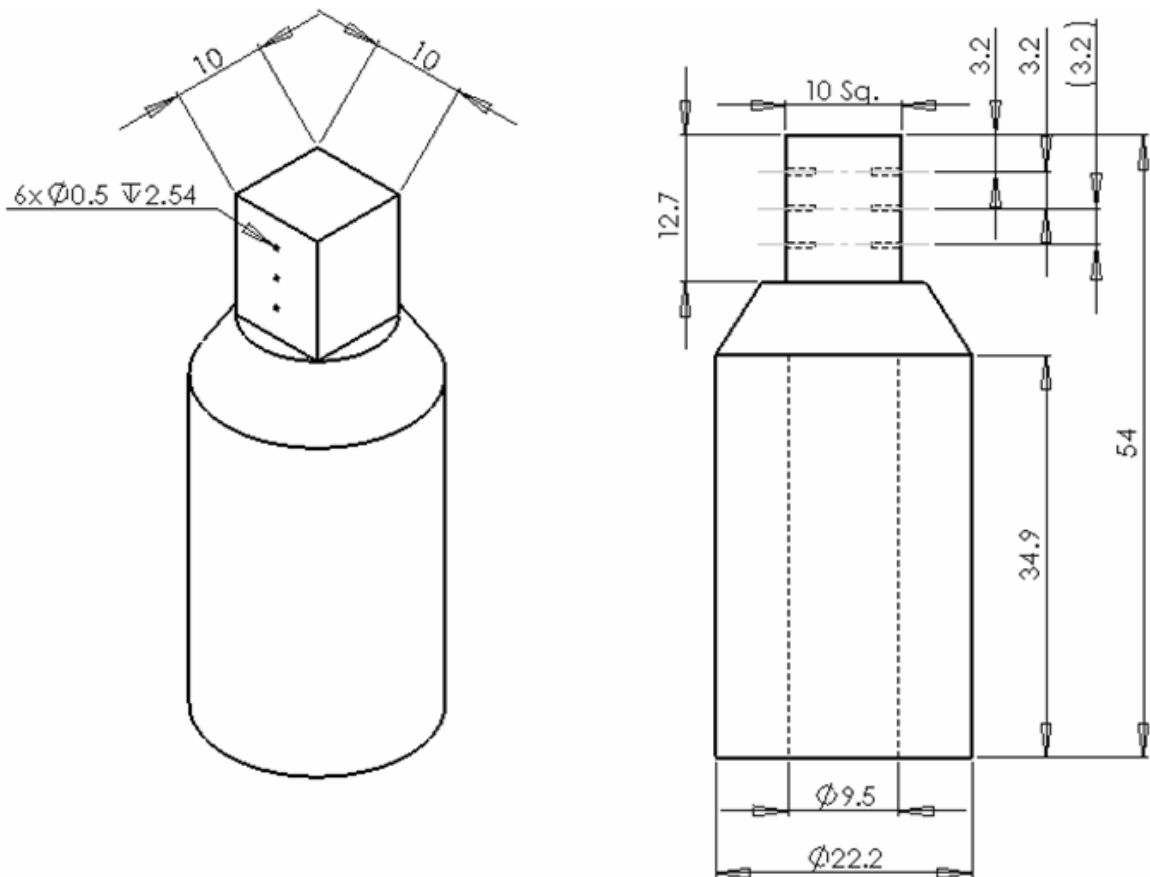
Drawing of calibrated copper heater core (all dimensions in millimeters).
